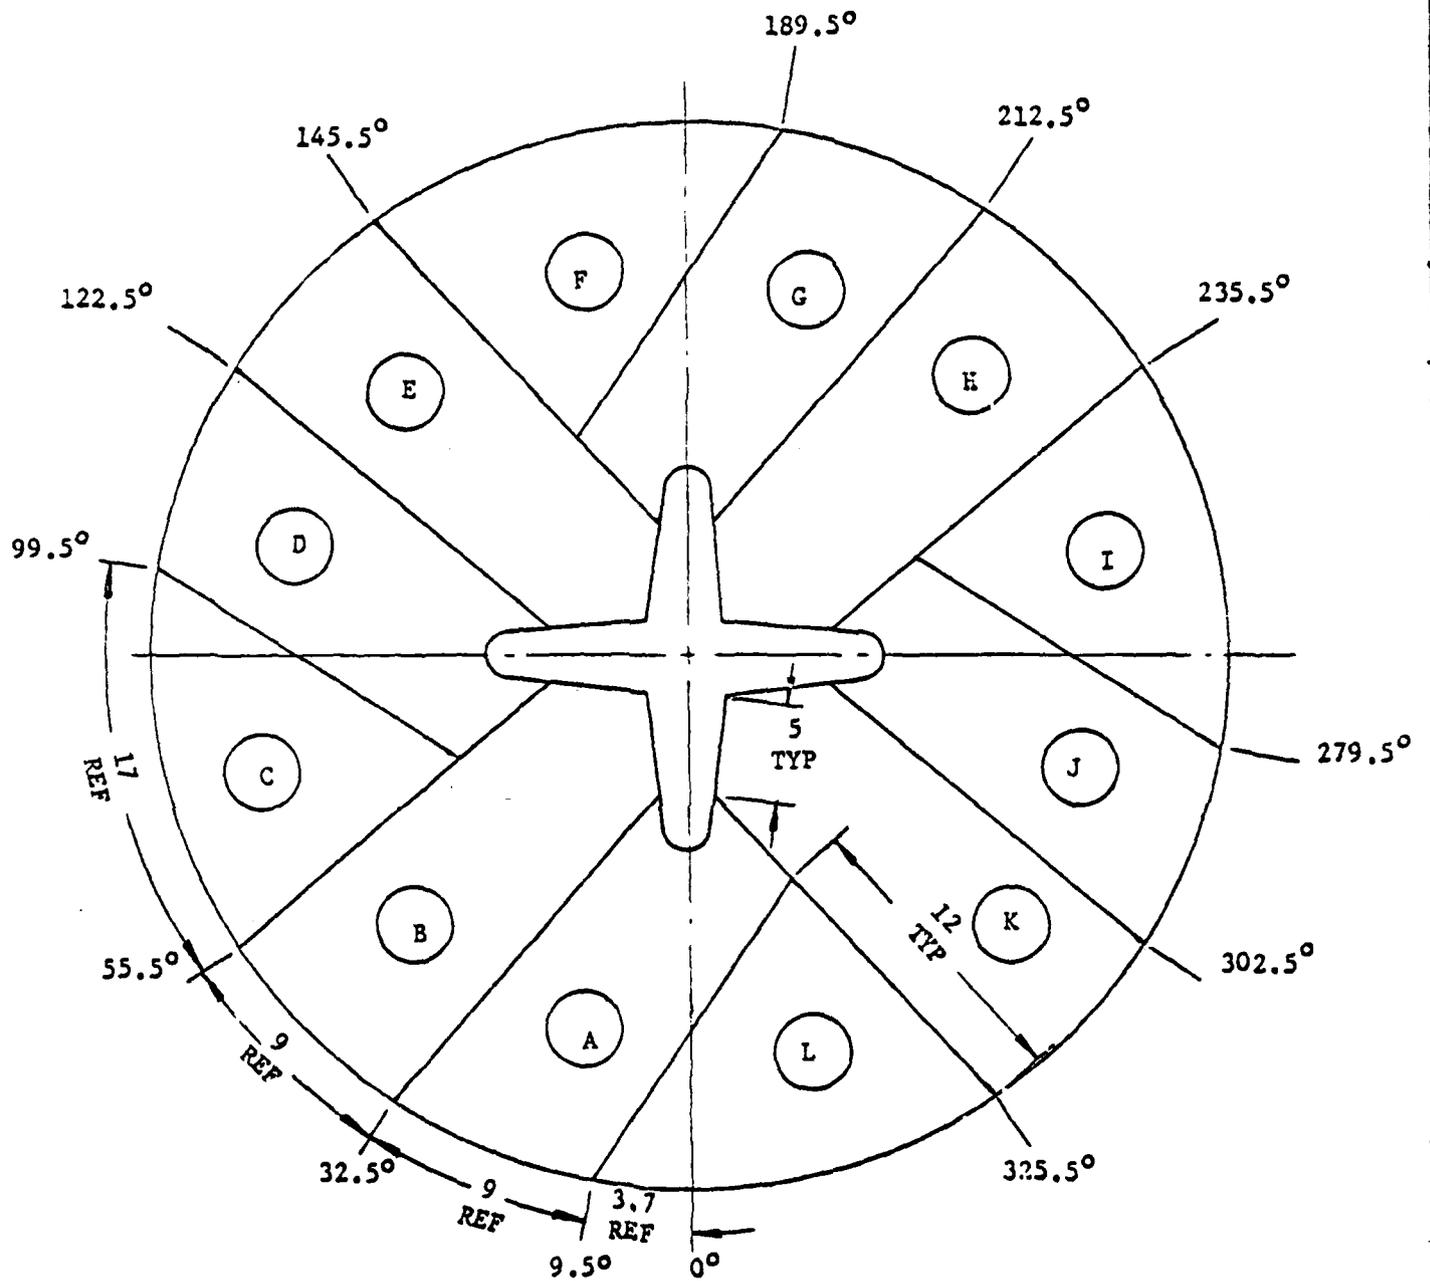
Section 3 and 4 Segment Layout and Letter Identification
